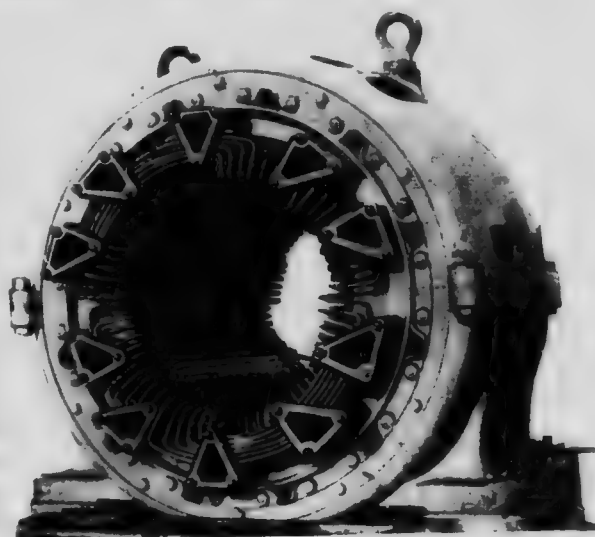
Coil-Wound Armature of Brush Turbo-Alternator, showing Clamped End Connectors.
